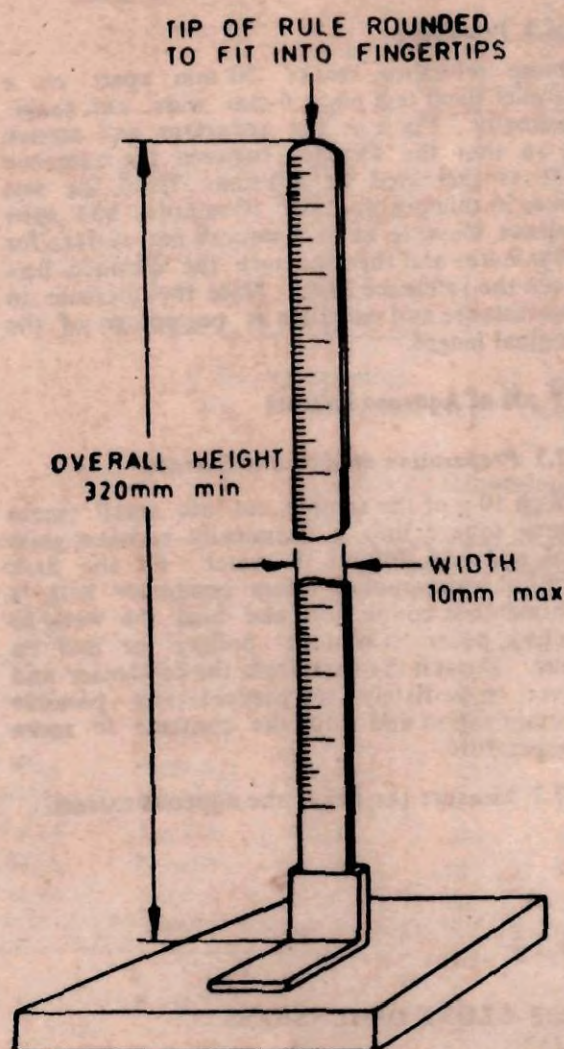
DEVICE FOR MEASUREMENT OF GLOVE DIMENSIONS
